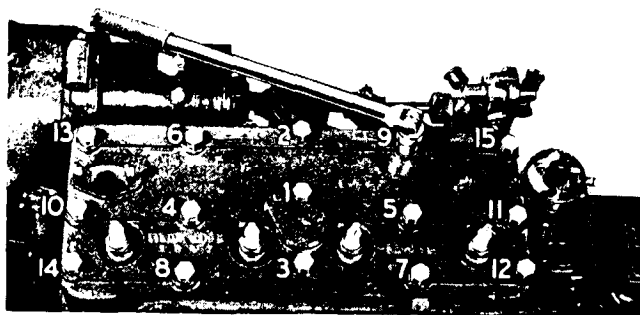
Tightening Cylinder Head. Work from Center Stud Nut Toward Sides and Ends, in Sequence as Illustrated. Four-Cylinder Engine Shown
